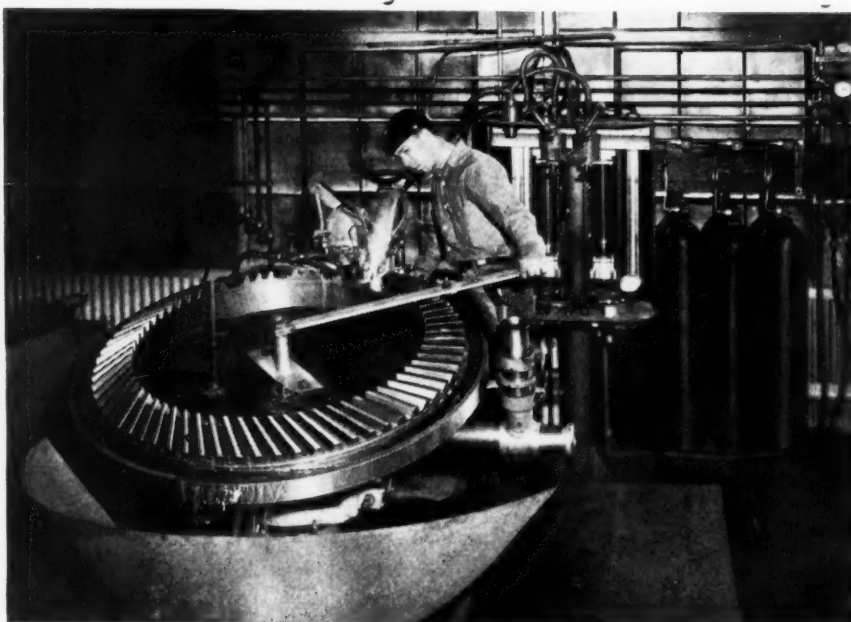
The Teeth of Spiral Bevel Gears and Pinions are Flame-hardened by Torches and Quenching Nozzles, Designed as Shown in Fig. 8
